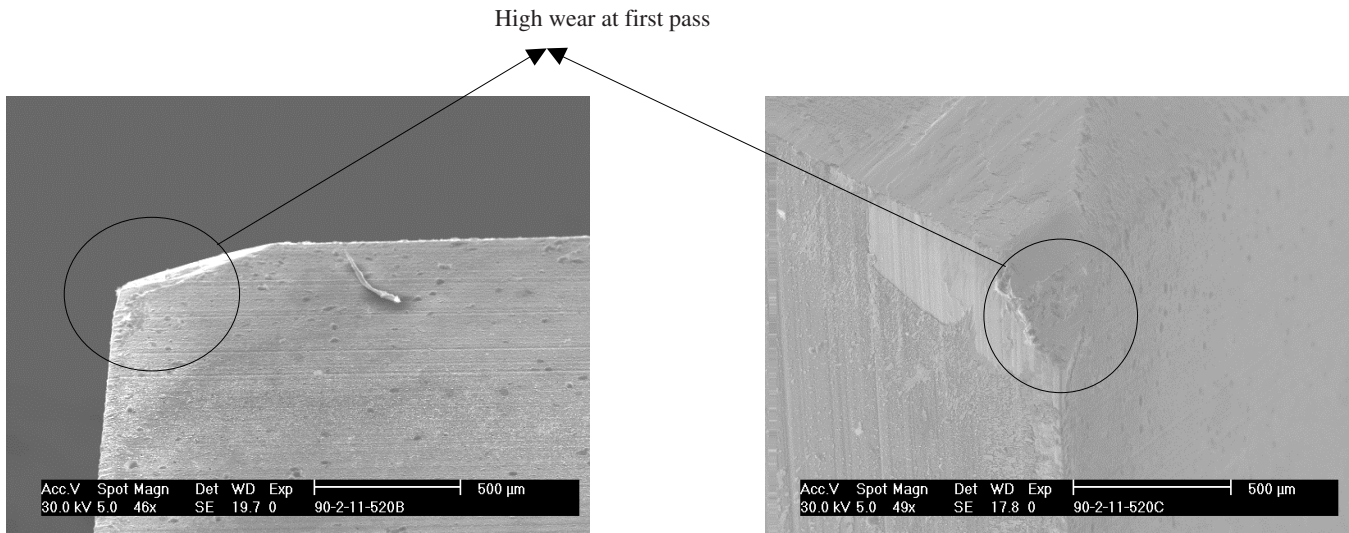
SEM picture for cutting speed (Feed rate 0.15 mm/rev, axial depth 2 mm): Cutting speed 100 m/min
